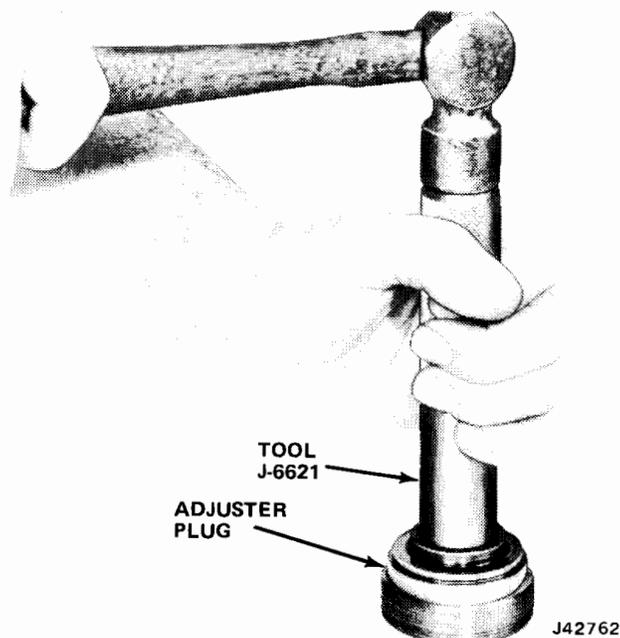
Installing Needle Bearing in Adjuster Plug
